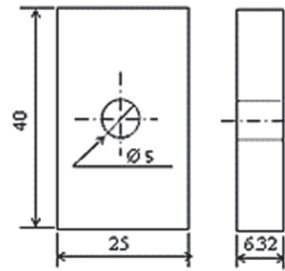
Geometry and dimensions of holed plate (Dimensions are in mm).
